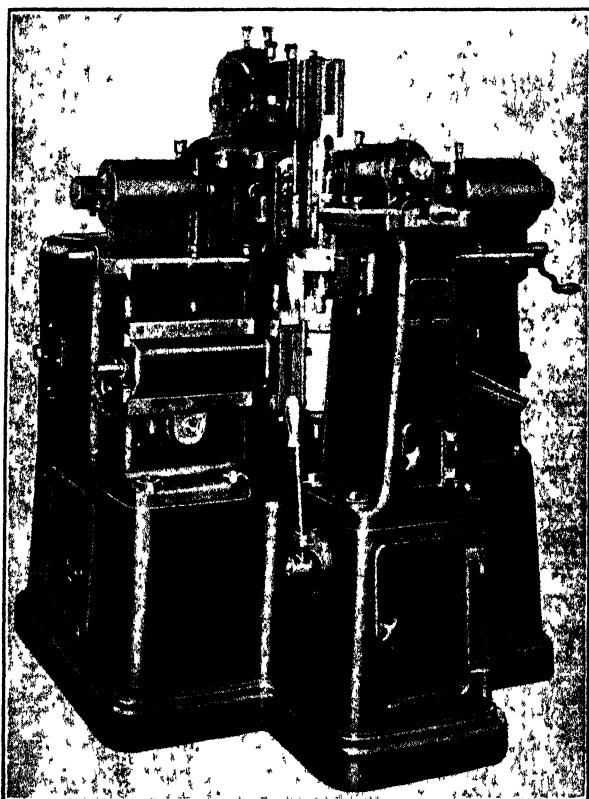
Semi-automatic spool-head machine (Courtesy of the Western Electric Company)
